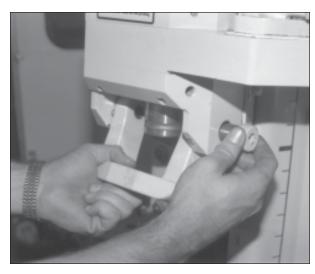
Install shoulder bolt on the side of latch opposite detent ball indenture.
